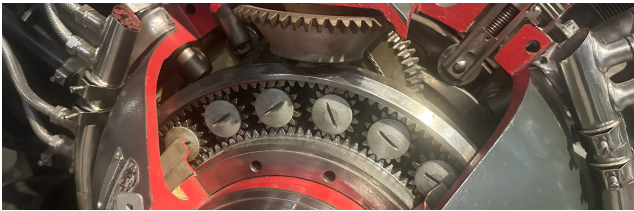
Wright R-1820 Engine Epicyclic Geartrain
